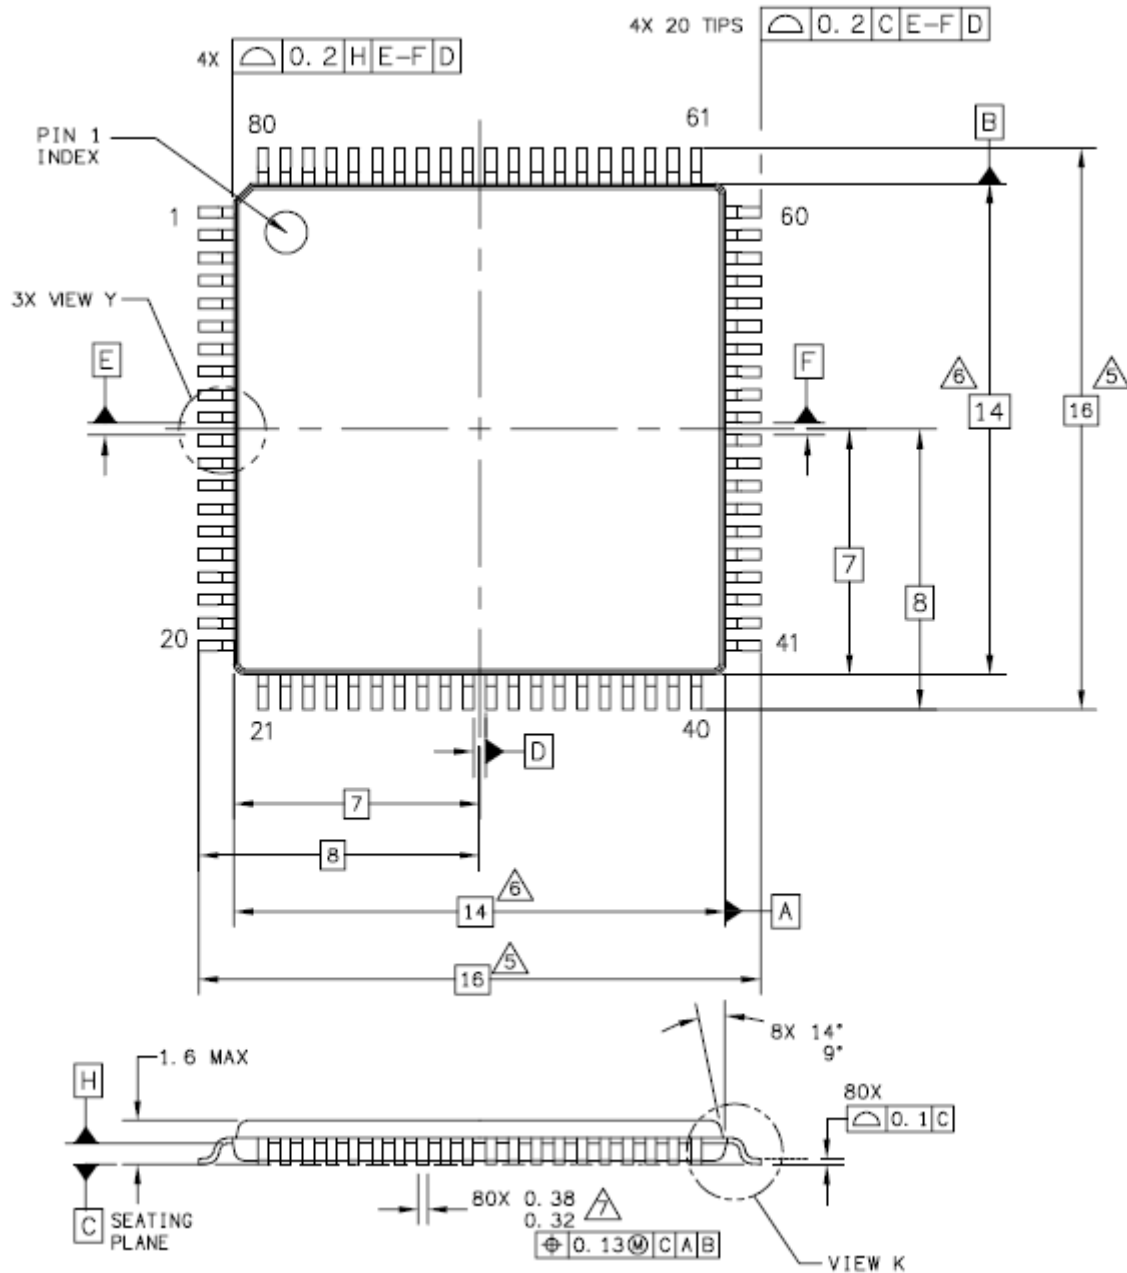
80-Pin Package Outline Drawing (1 of 2)
